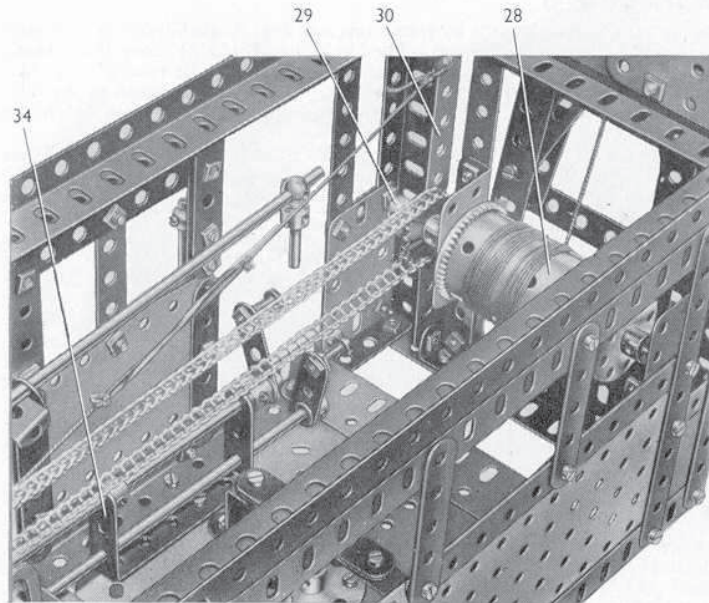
The mechanism control levers and one of the winding drums are seen in this view
